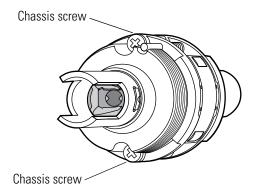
Separating the hub and sleeve assembly from the chassis
